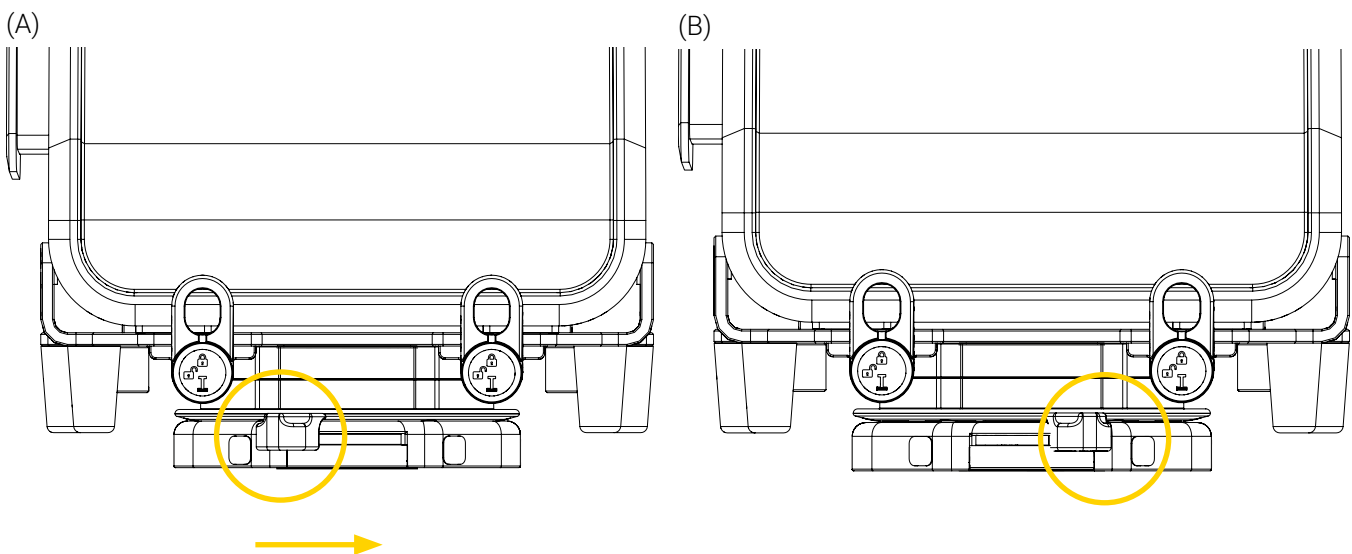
Locking the mounting bracket on the Universal Mounting Base
